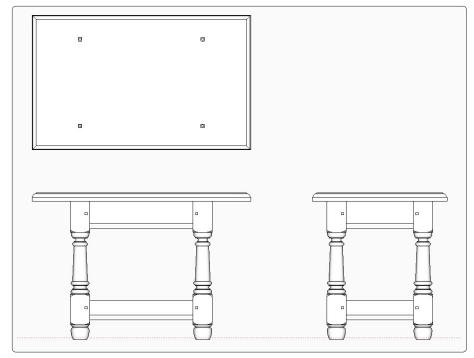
With the Camera set to Parallel Projection, the three copies appear as twodimensional drawings.
